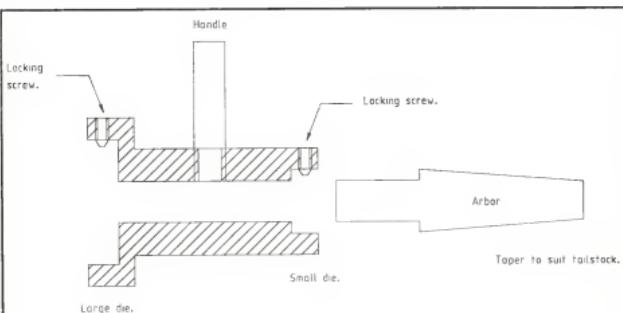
HOME MADE DIE HOLDER FOR THE LATHE
